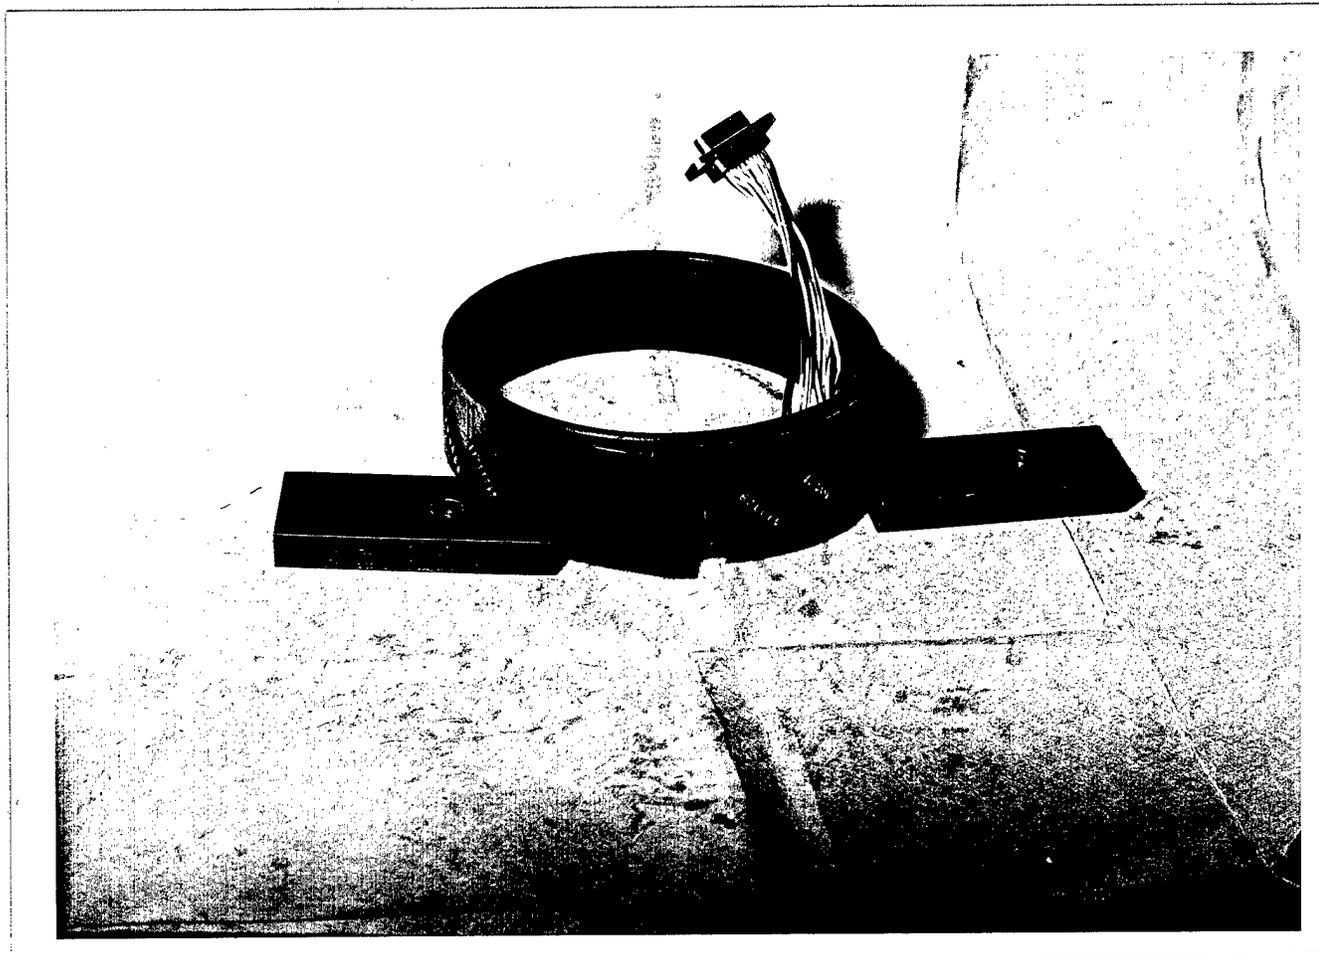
Test Specimen Used in Tests 4-A, 4-B, 4-C and 5 After Fracture from External Pressure. Ply Layup is $\pm 45^\circ$.
